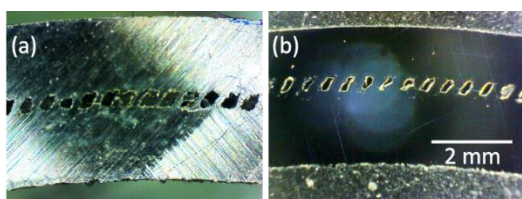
(a) Surface milled top surface of the microstructured thin wall (60° orientation) and (b) final cross-section after outer diameter milling (100 m/min, 0.025 mm/rev)
